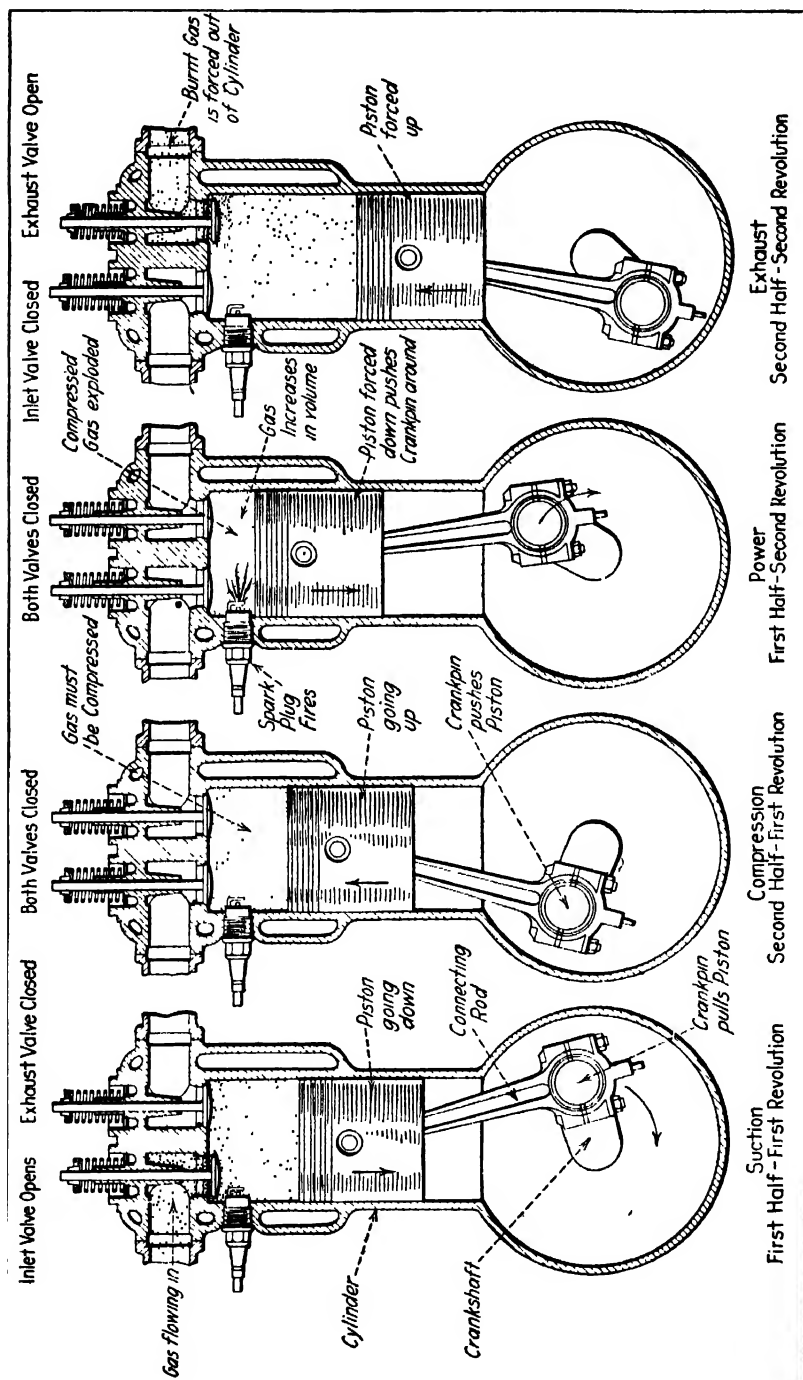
Diagrams Explaining Action of Four-Cycle Valve-in-the-Head Engine. A System of Construction Most Aircraft Engines Follow.
